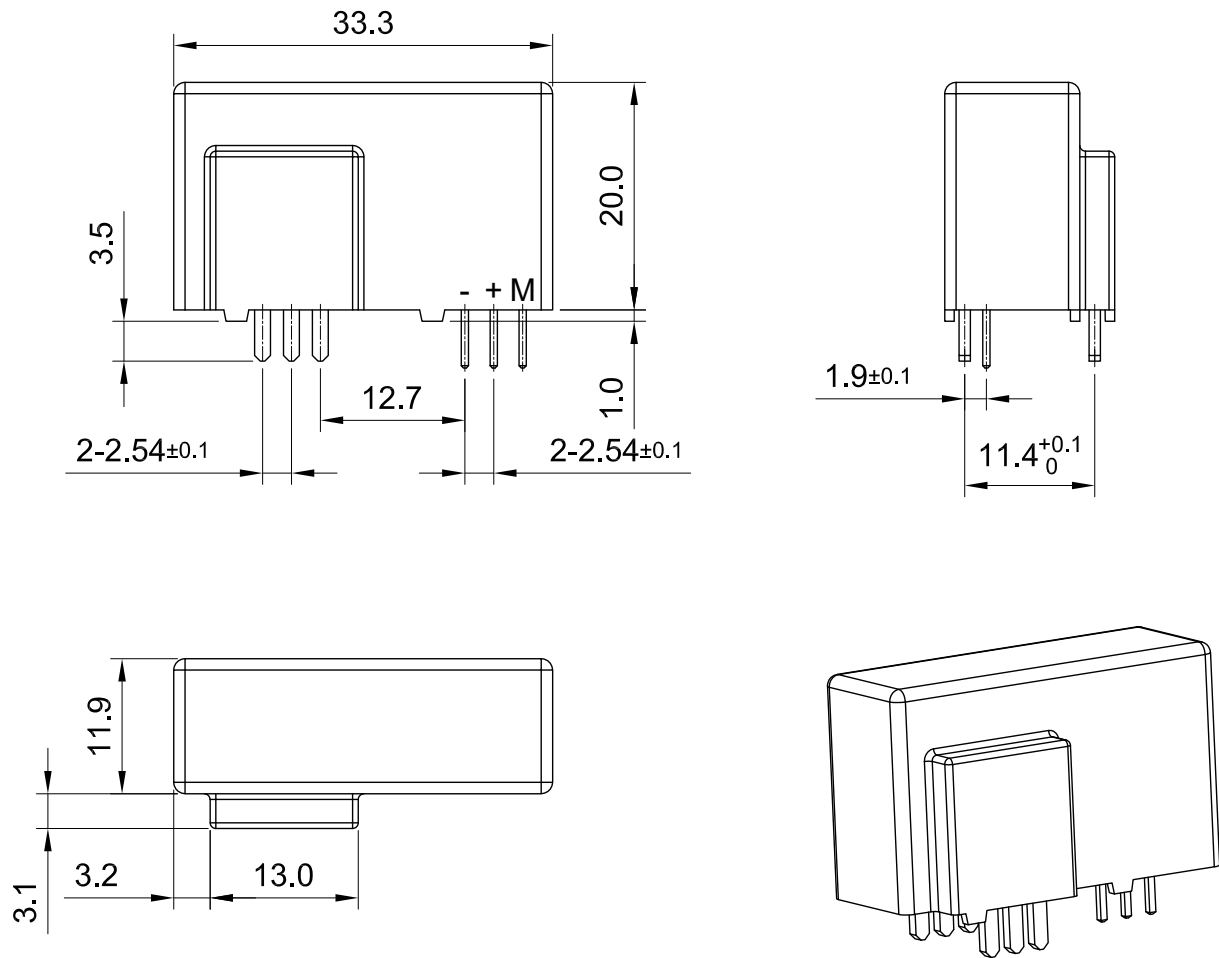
TMR7308-B Dimension (unit: mm, tolerances for unmarked scales ± 1 mm)
